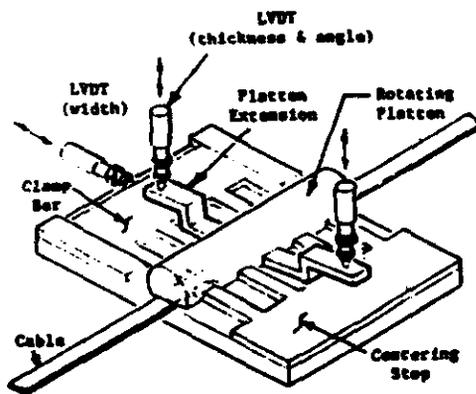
Isometric illustration of the measuring head with the load ram and guides removed for clarity.
